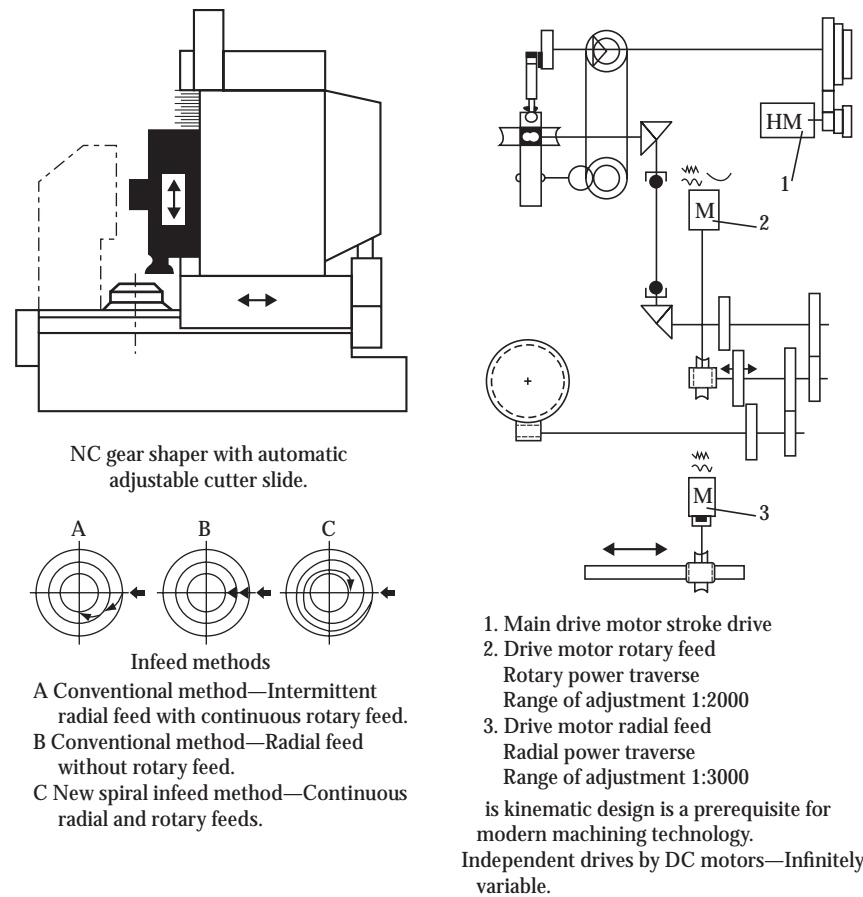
Schematic design of an NC gear-shaping machine. (Courtesy of Lorenz, a subsidiary of Maag Gear Wheel Co., Ettlingen, German Federal Republic.)
